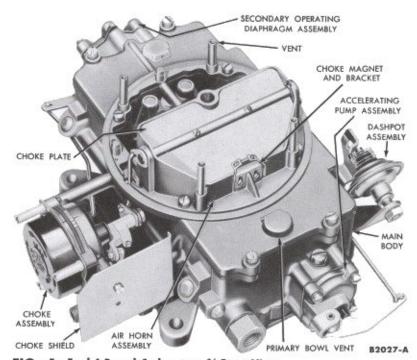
Ford 4-Barrel Carburetor-34 Front View
